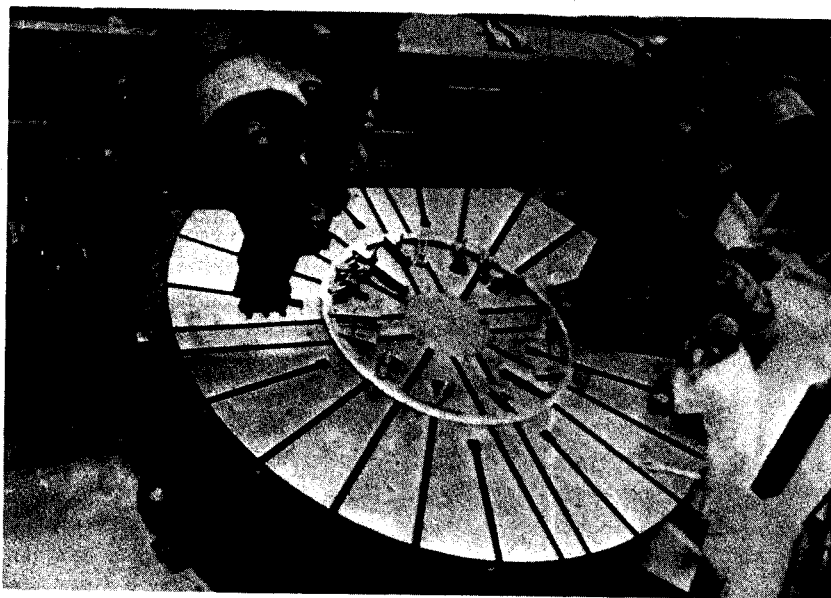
Recently acquired 10 foot vertical lathe, to be used for winding the K800 cyclotron coil. It is being used here to machine a gasket ring for the K500 cyclotron.
